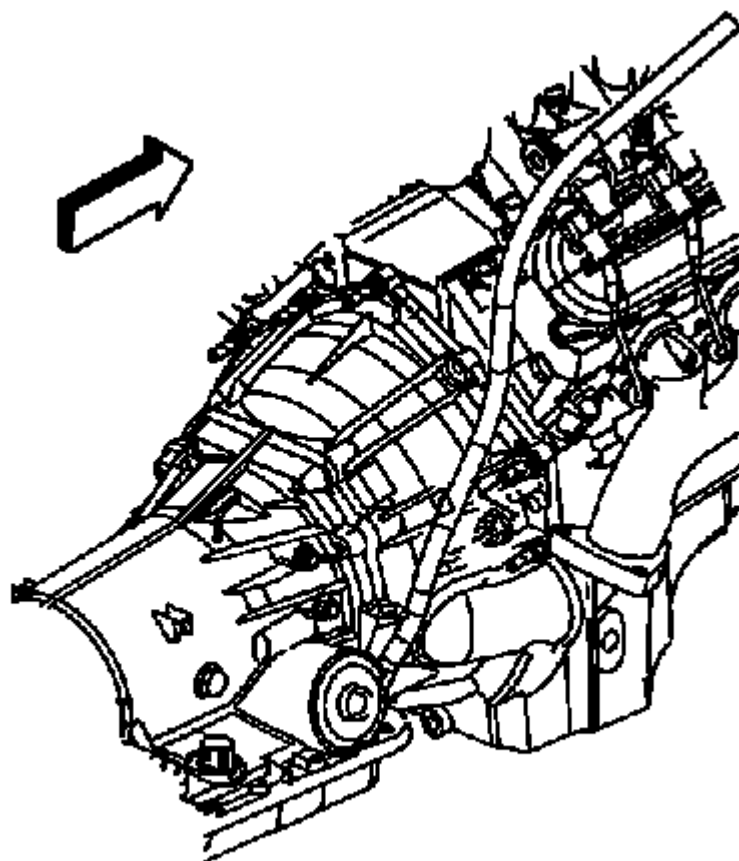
Identifying Stud & Bolt Securing Transmission To Engine (Right Side)
